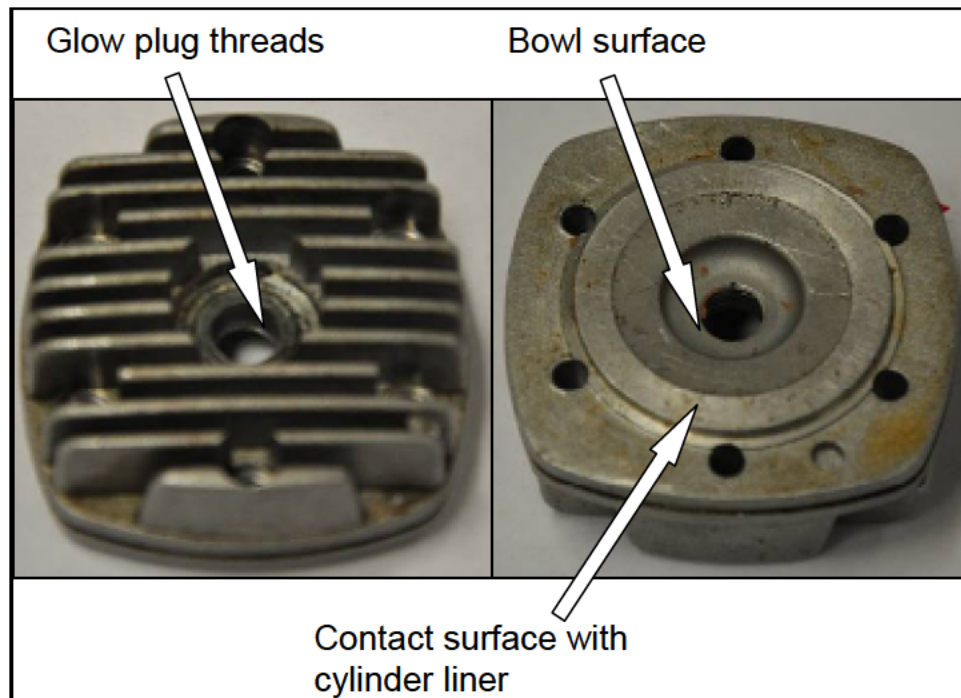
Photographs showing the top and bottom of a stock cylinder head for the OS 46 FX engine.
